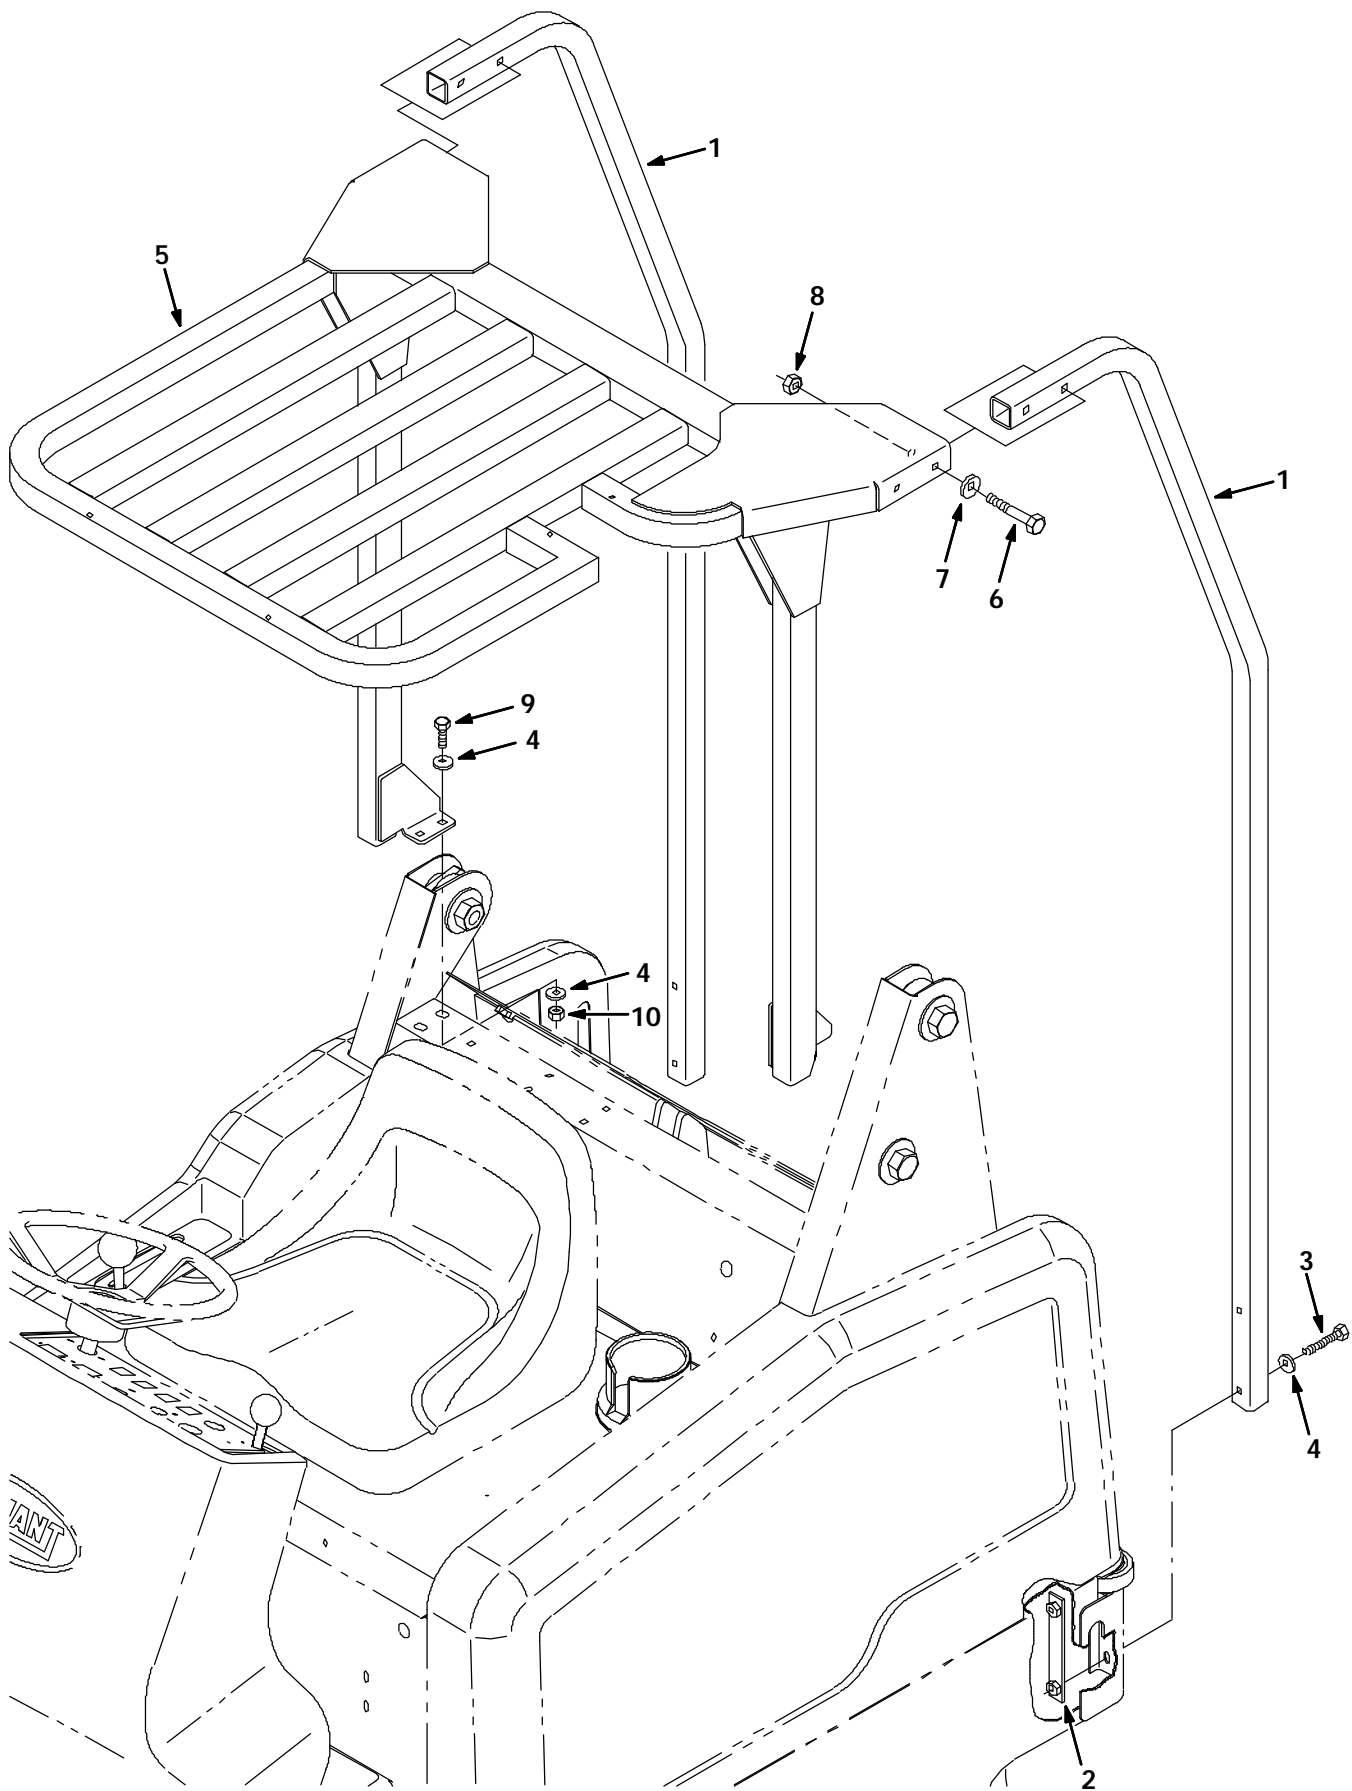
OVERHEAD GUARD KIT INSTALLATION
